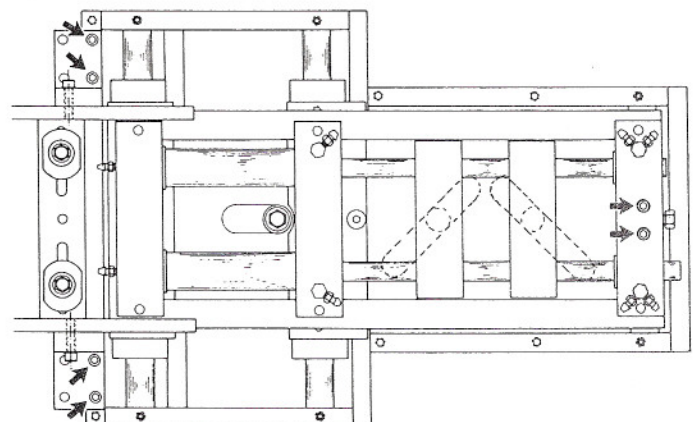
Figure III: Install 45° cam with three 1/4-inch flat head screws to the guide spacer at → .
